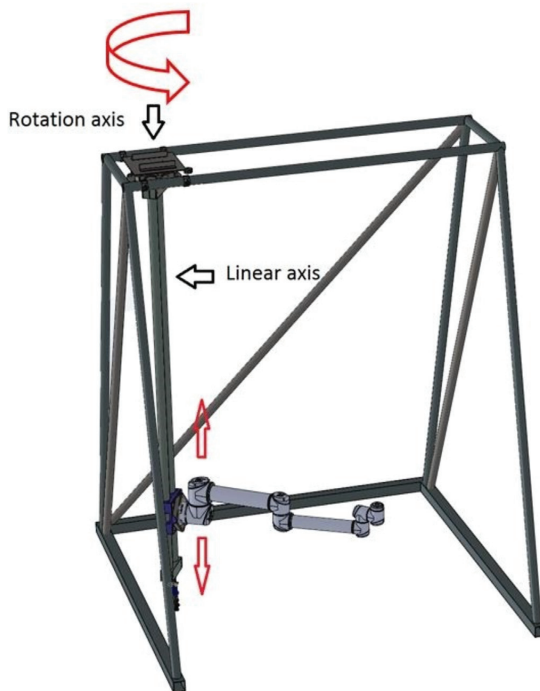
A CAD model of the linear axis and the rotational axis assembly. A support frame was manufactured to suspend the assembly from the ceiling.
